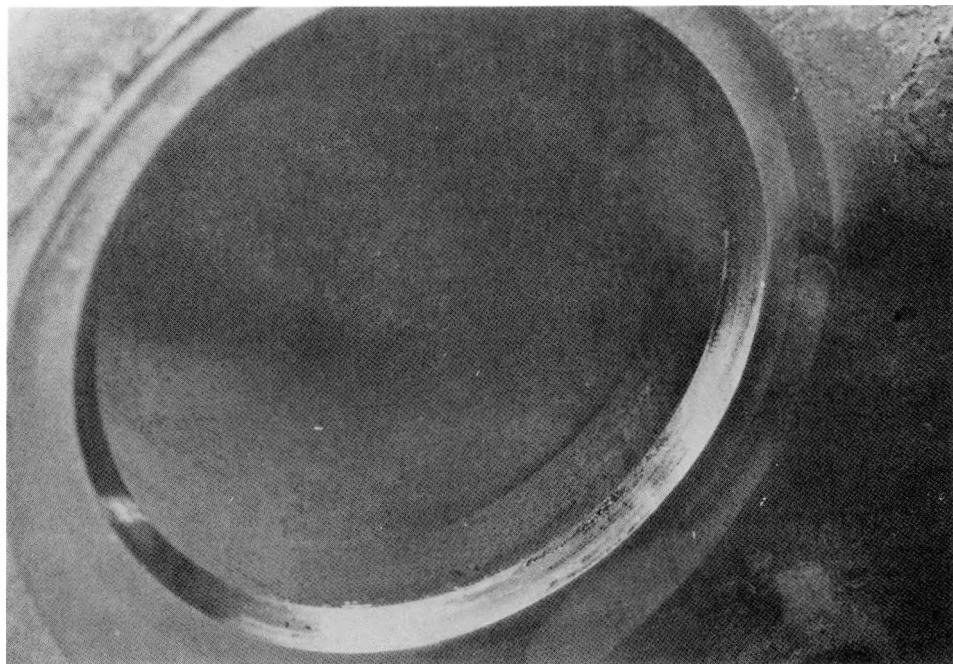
Carbon Deposits on Cylinder Head After Endurance Tests
